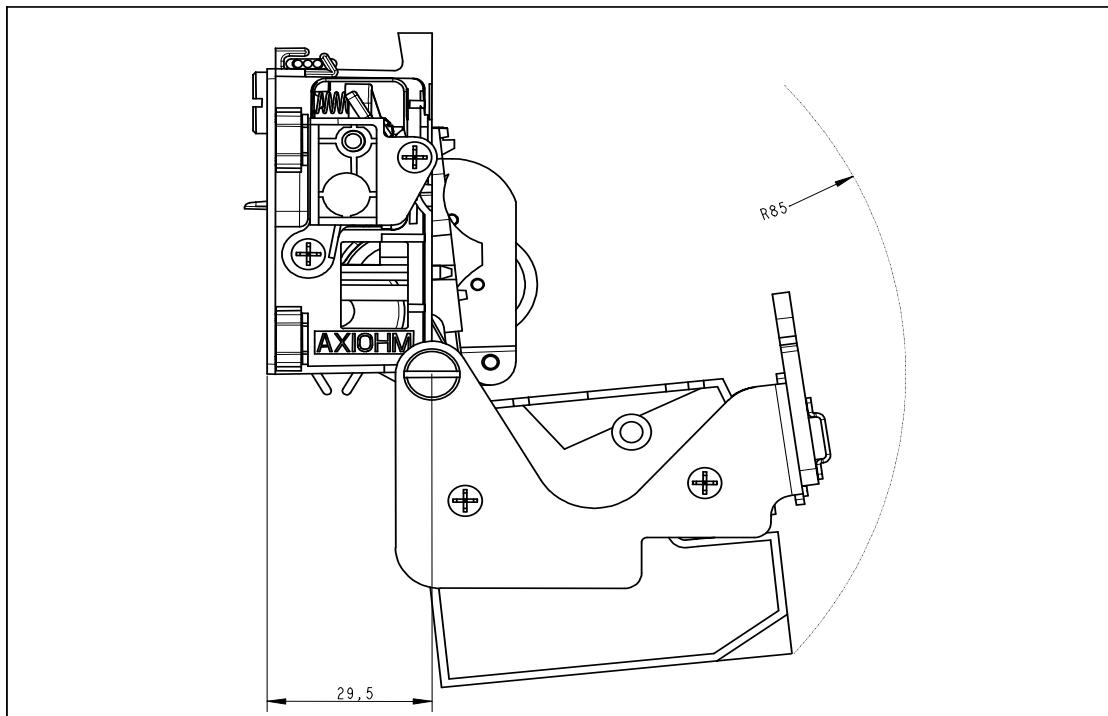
Size of printer when open ( $29,5 + 85 = 114,5$  mm)
